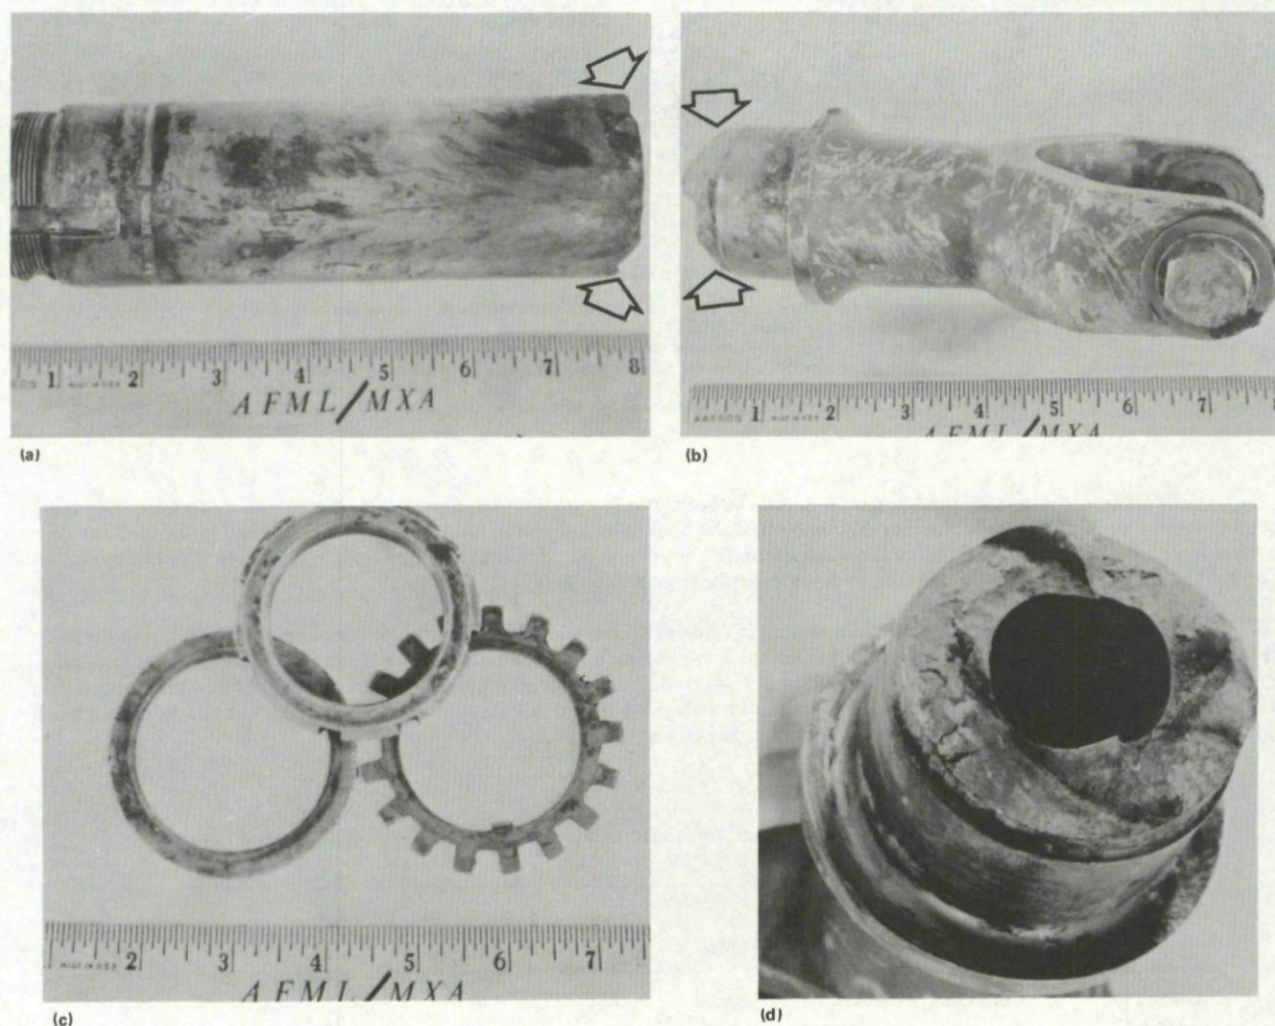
Corrosion fatigue of a 4340 steel rotor attachment assembly
